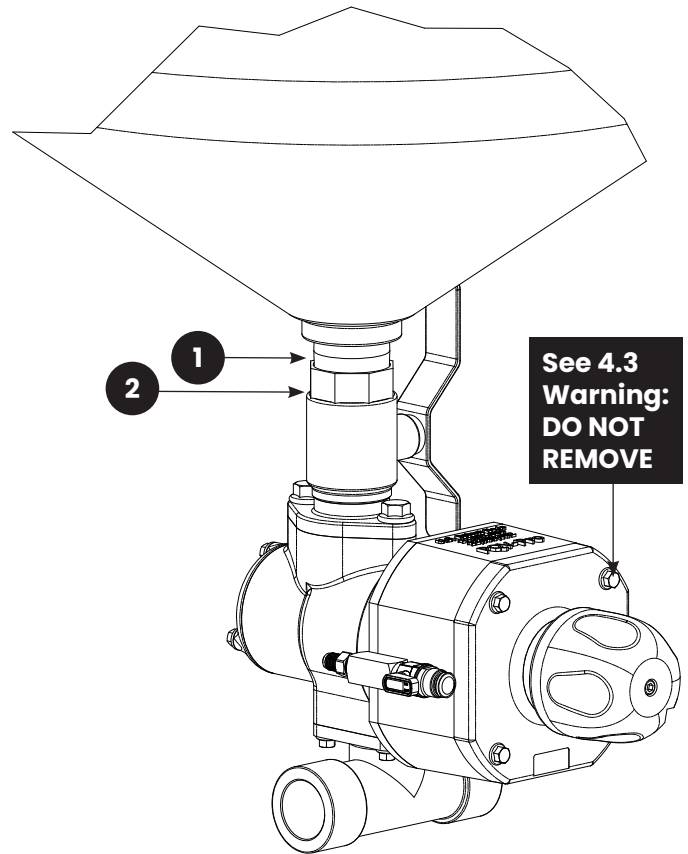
(1) 1-1/2" Installation Nipple; (2) Use wrench to tighten only on wrench flats
